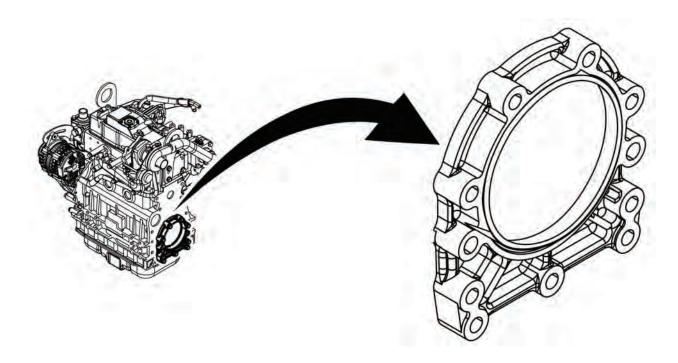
Crankcase Rear Bearing Case Cover — Location.
